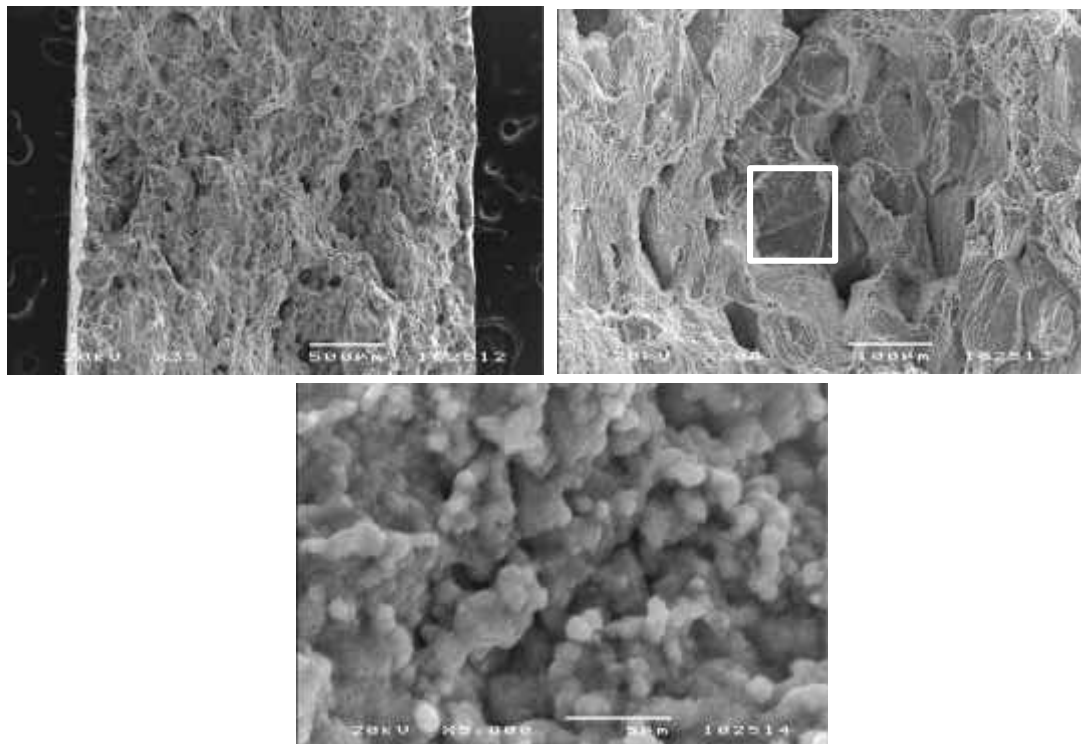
Fracture surfaces of 20%(2.4t) CW-316LN-PH specimen
